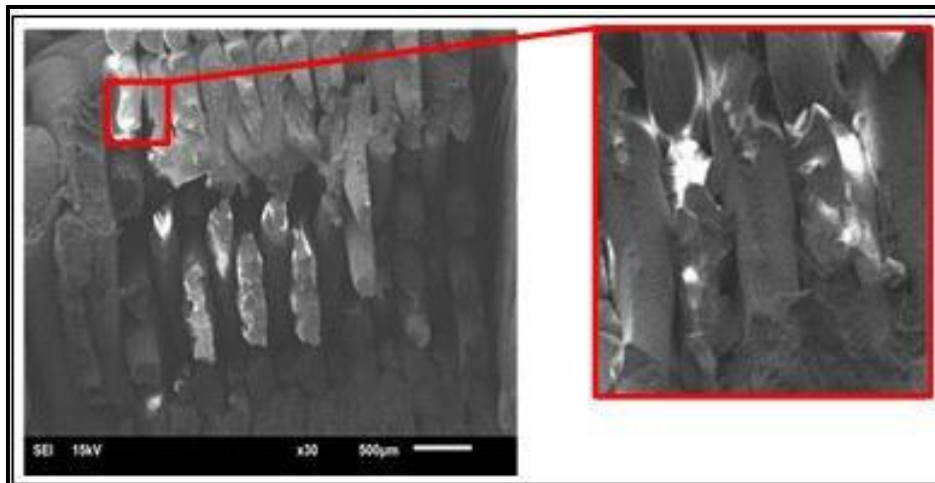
Fracture surfaces of the ABS specimen
